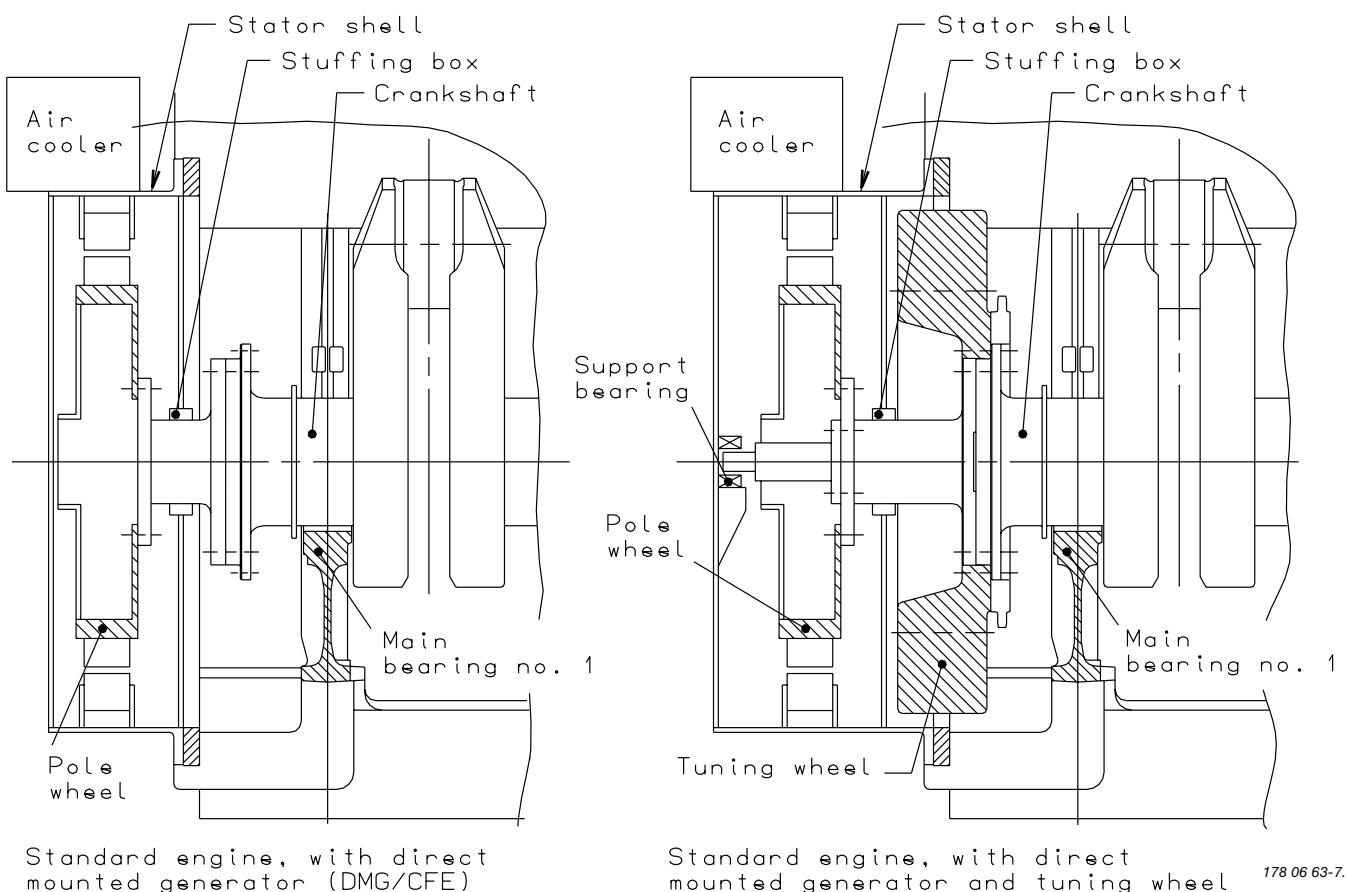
Standard engine, with direct mounted generator and tuning wheel
